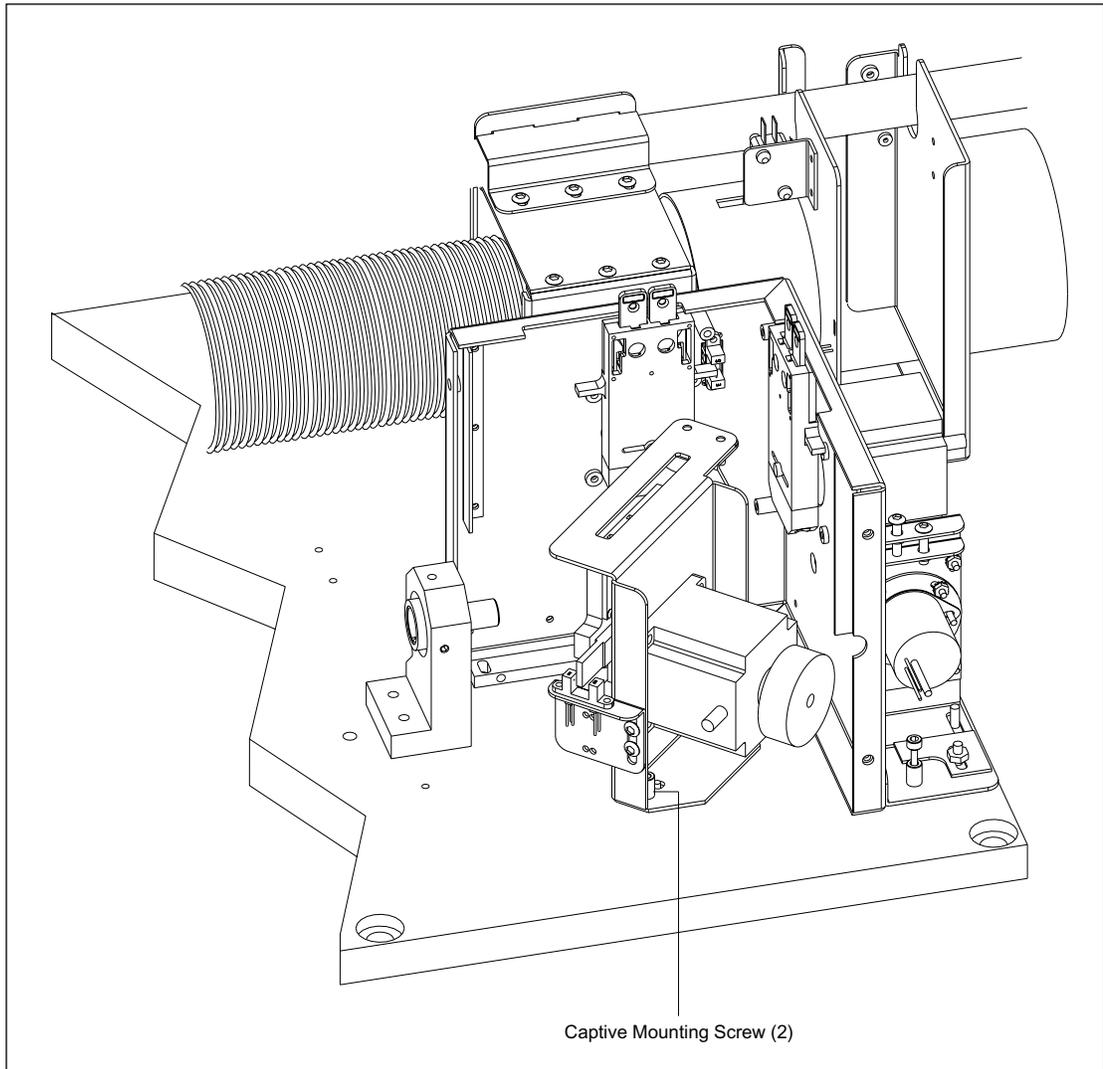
Secondary Beamsplitter Assembly Mounting.
